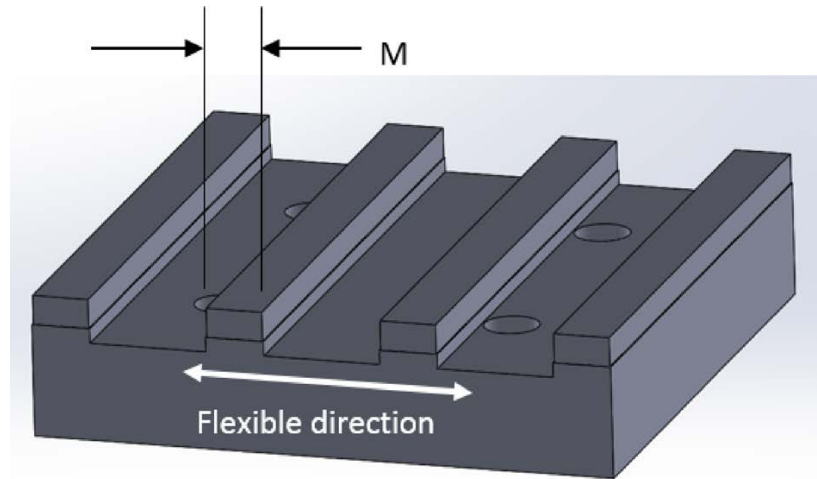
The workpiece included four ribs that were initially machined to the same dimensions. The {5 mm axial depth, 2 mm radial depth} cuts were then performed on one edge at a different spindle speed for each rib. The SLE was calculated as the difference between the commanded, C , and measured, M , rib widths. The flexible direction for the flexure is identified.
